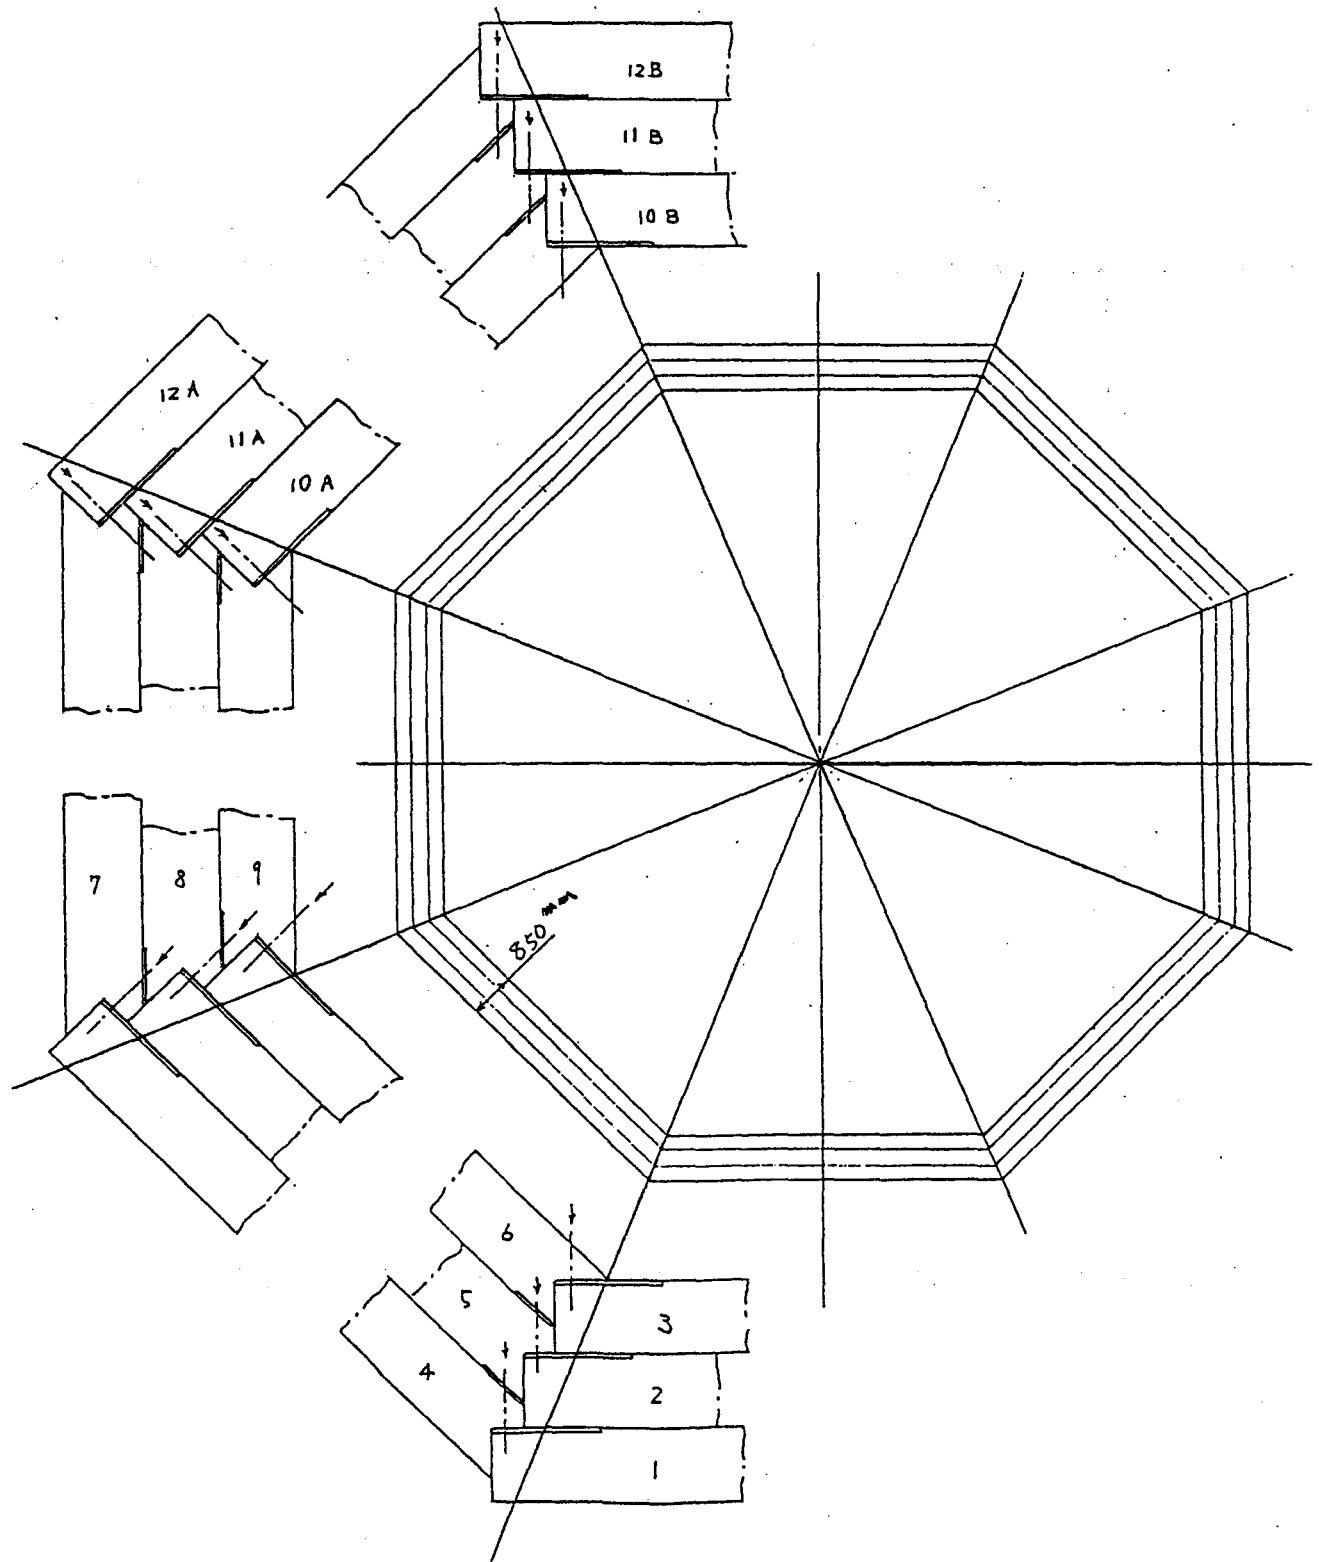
Assembly of an octagonal cylinder and unit iron pieces.
